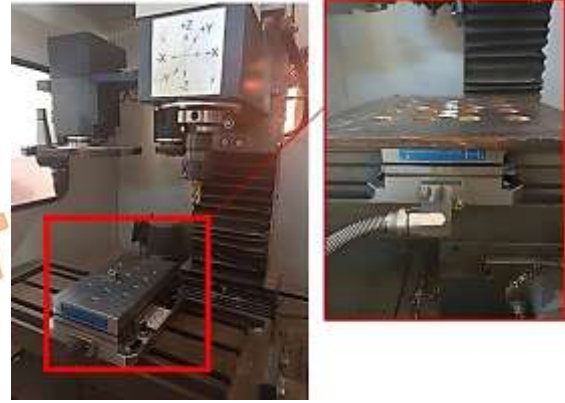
Sequential Assembly of the Dynamometer onto the Milling Machine and Mounting of the Lower Drilling Fixture Plate
